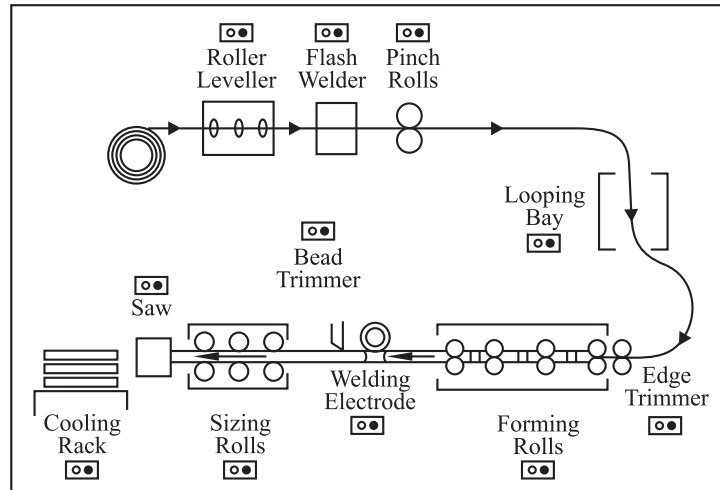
Representational display showing a continuous tube welding process
